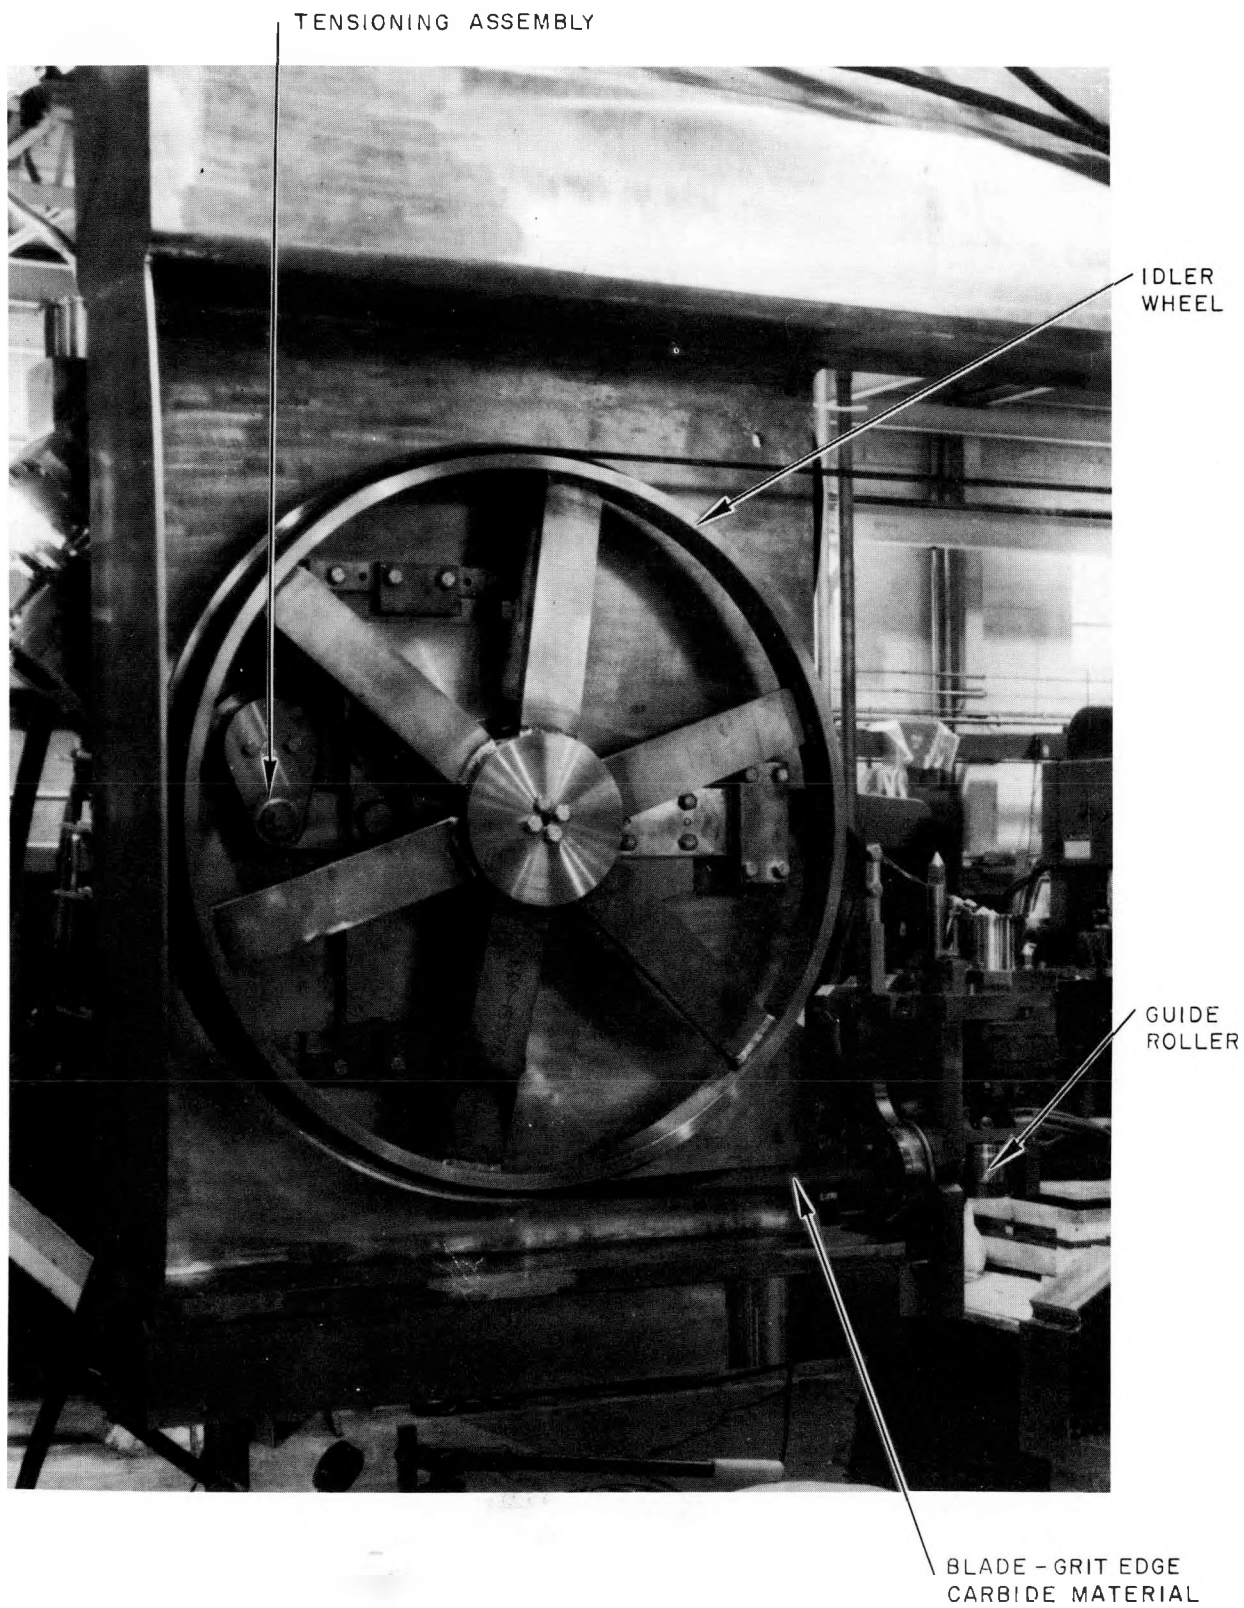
MDA-COS Bandsaw Idler Wheel Assembly
